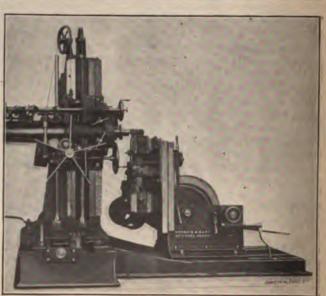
Horizontal Boring, Drilling and Milling Machine.
